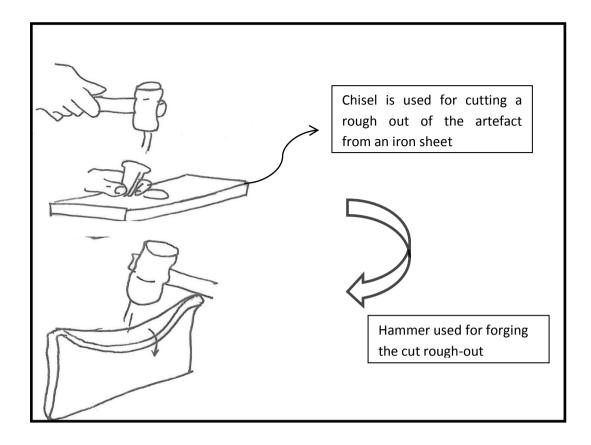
c: Forged Sheet is Cut Using a Chisel
